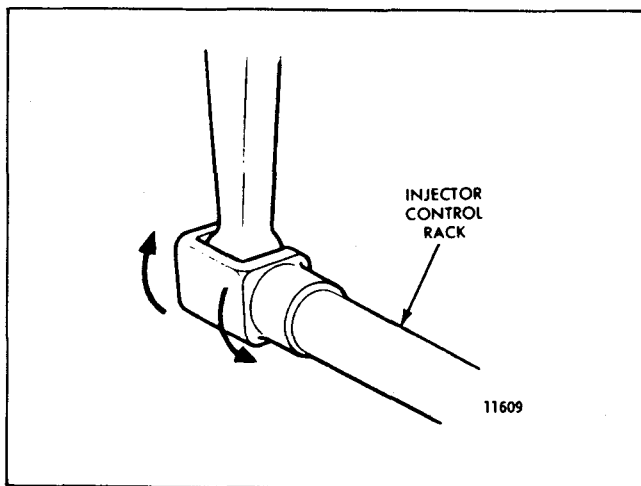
Checking Rotating Movement of Injector Control Rack
